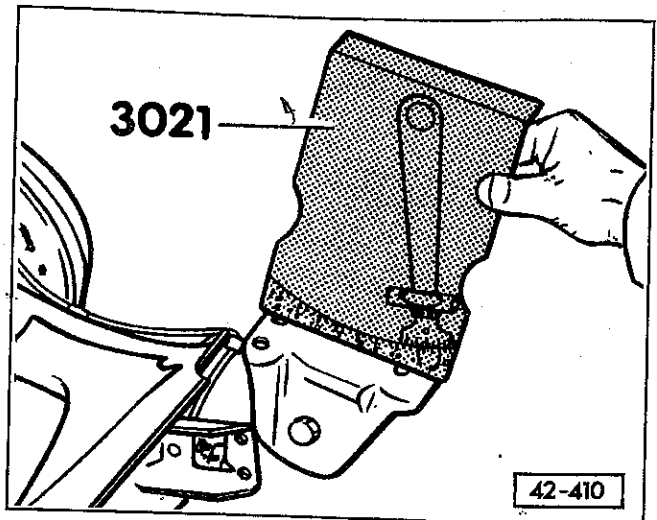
Axle beam mounting bracket being aligned at 12° ± 2° angle to axle beam prior to axle beam installation. Protractor shown is Volkswagen special tool no. 3021.
